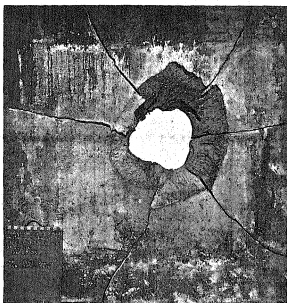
9-in. Krupp Non-cemented Armour Plate after Penetration by a 13.5-in. Shell
